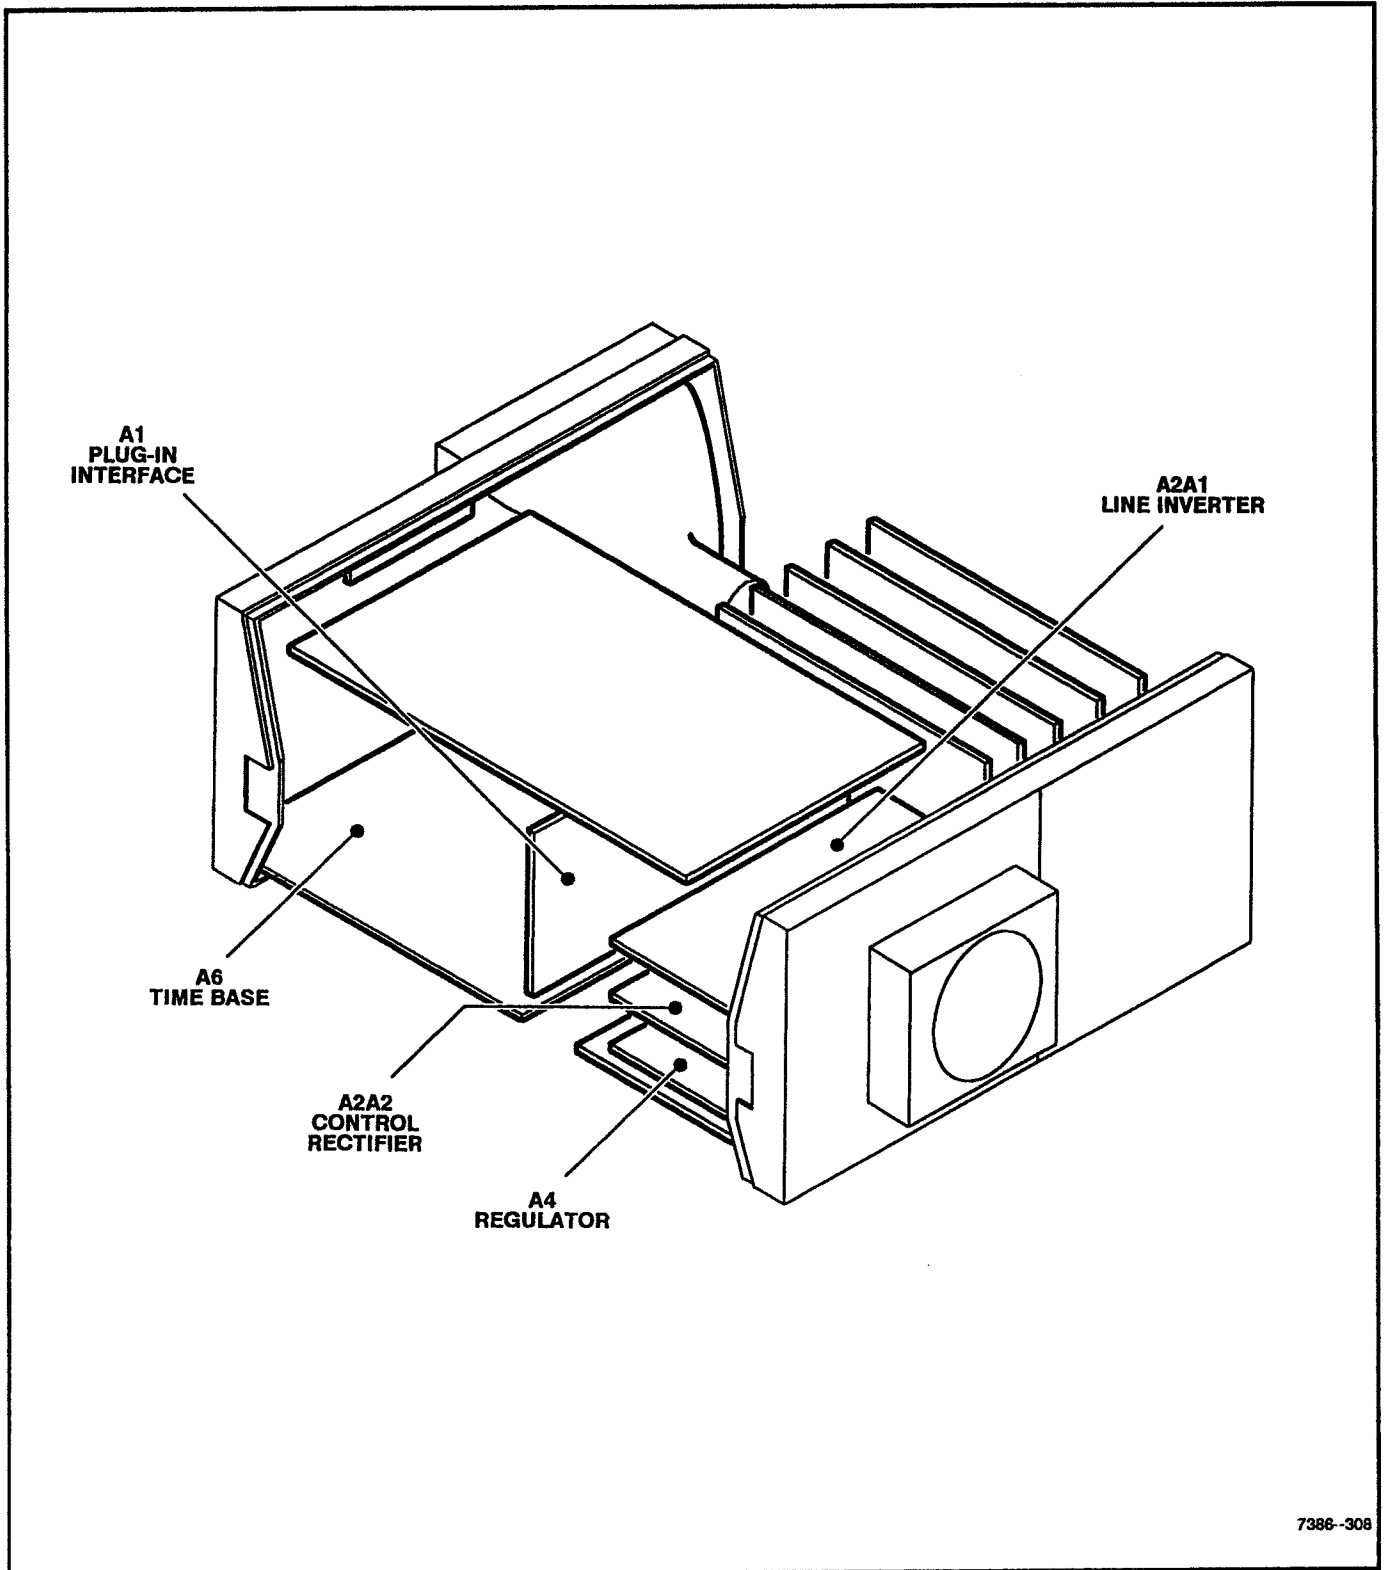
(cont). Location of circuit boards in the 11401/11402.
